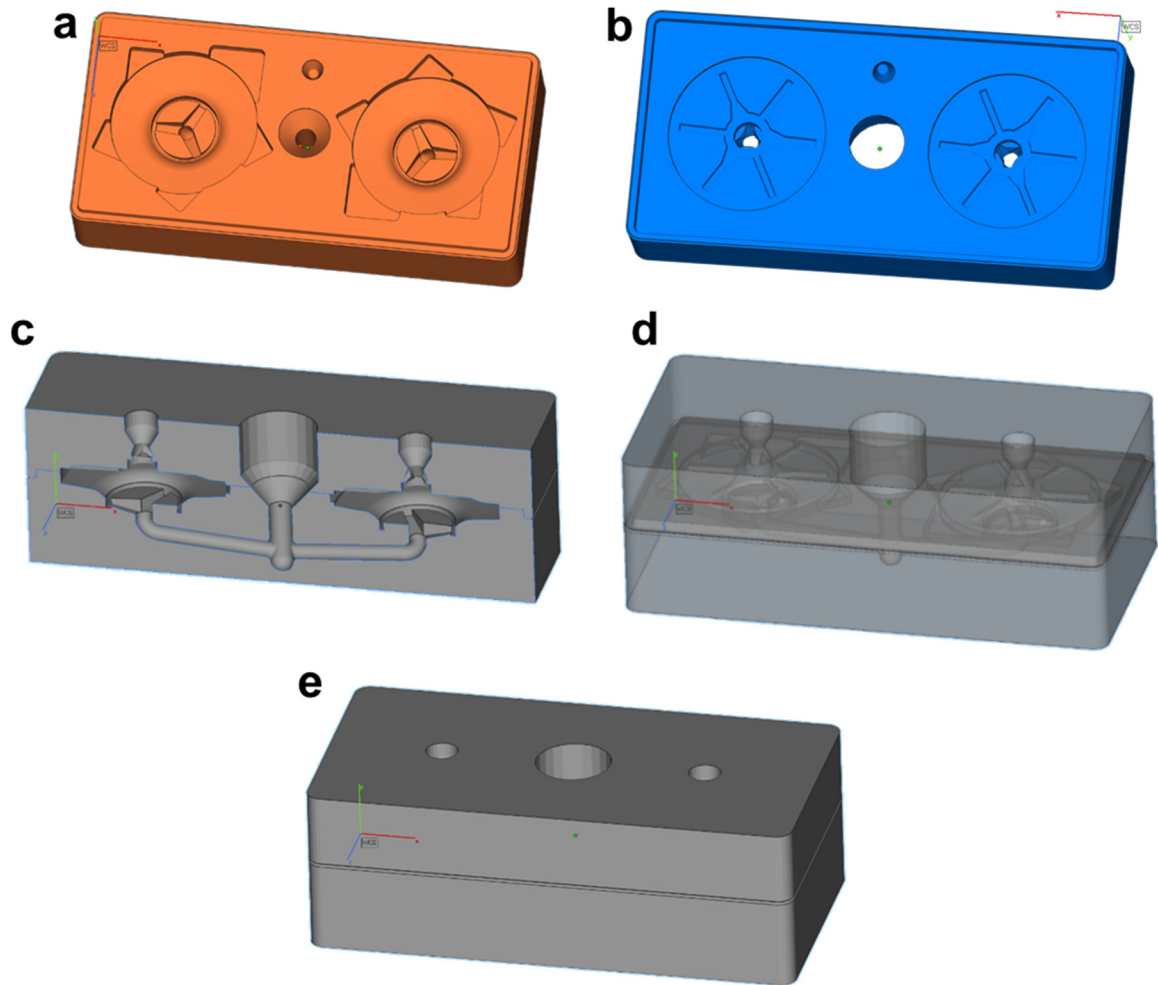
3D views of the sand mould design: (a) lower mould cavity, (b) upper mould cavity, (c) mould cross section, (d) transparent mould view, (e) complete mould view.
